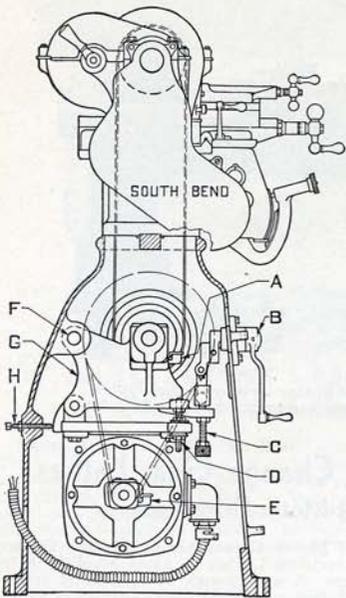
Drawing showing Principal Working Parts of Underneath Belt Motor Drive Mechanism.
